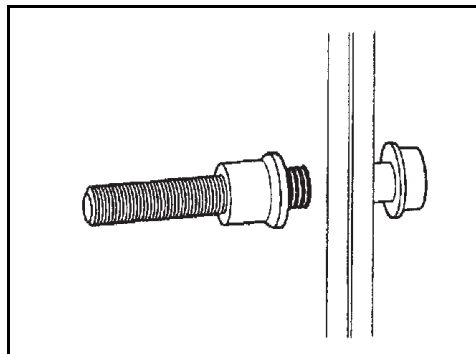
Place Collar Over Fastener Pintail 01_0019
